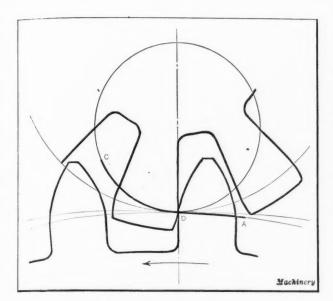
Pinion of Die-cut or Drawn Type and Gear designed to give Maximum Action after Line of Centers
